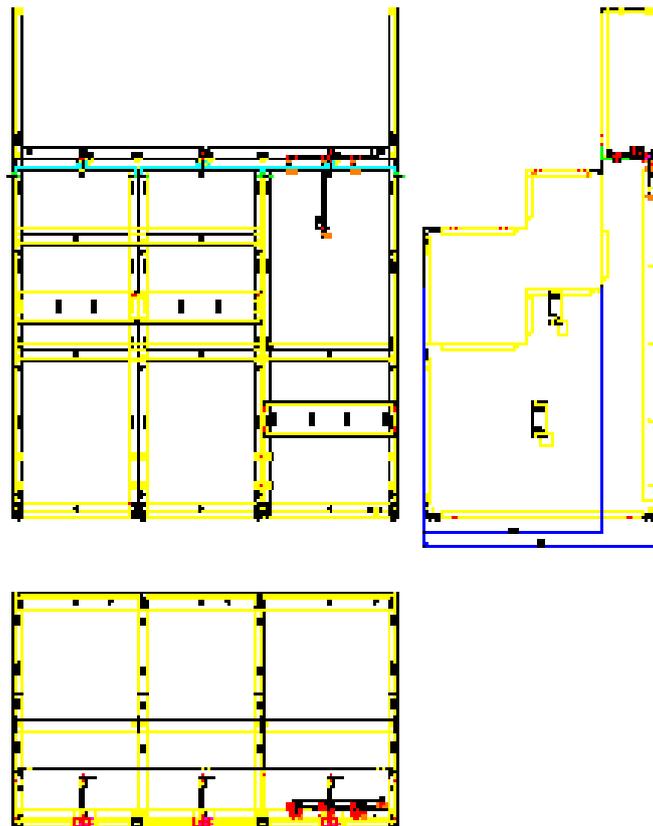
The top view, front view and left view of the final drawing of fully implemented mechanical support of vessel
